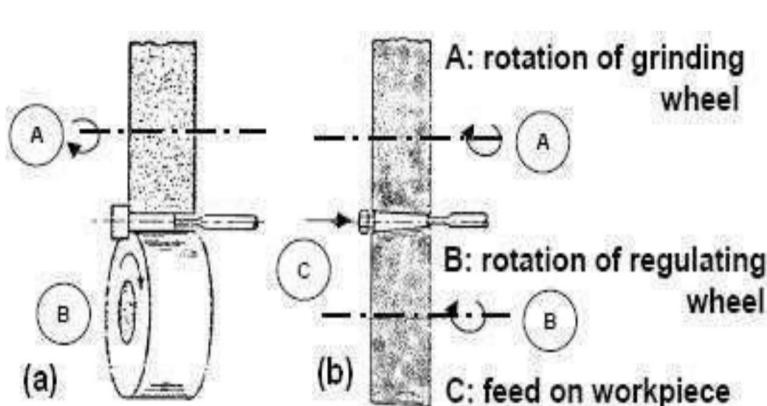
Centreless (a) infeed and (b) end feed grinding
